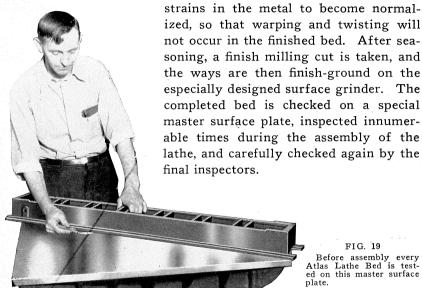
Before assembly every Atlas Lathe Bed is tested on this master surface
